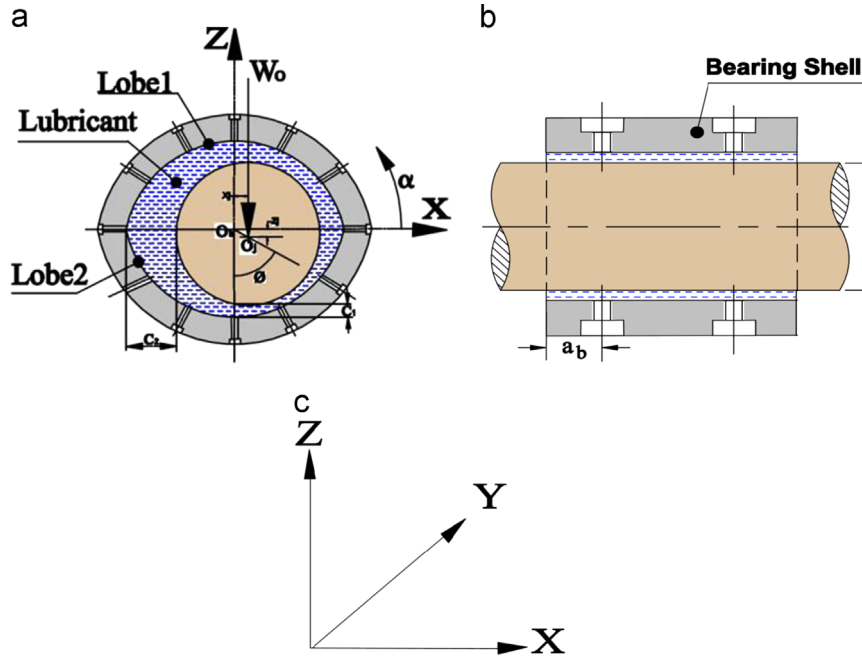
Geometry of symmetric 2-lobe hole entry hybrid journal bearing.
